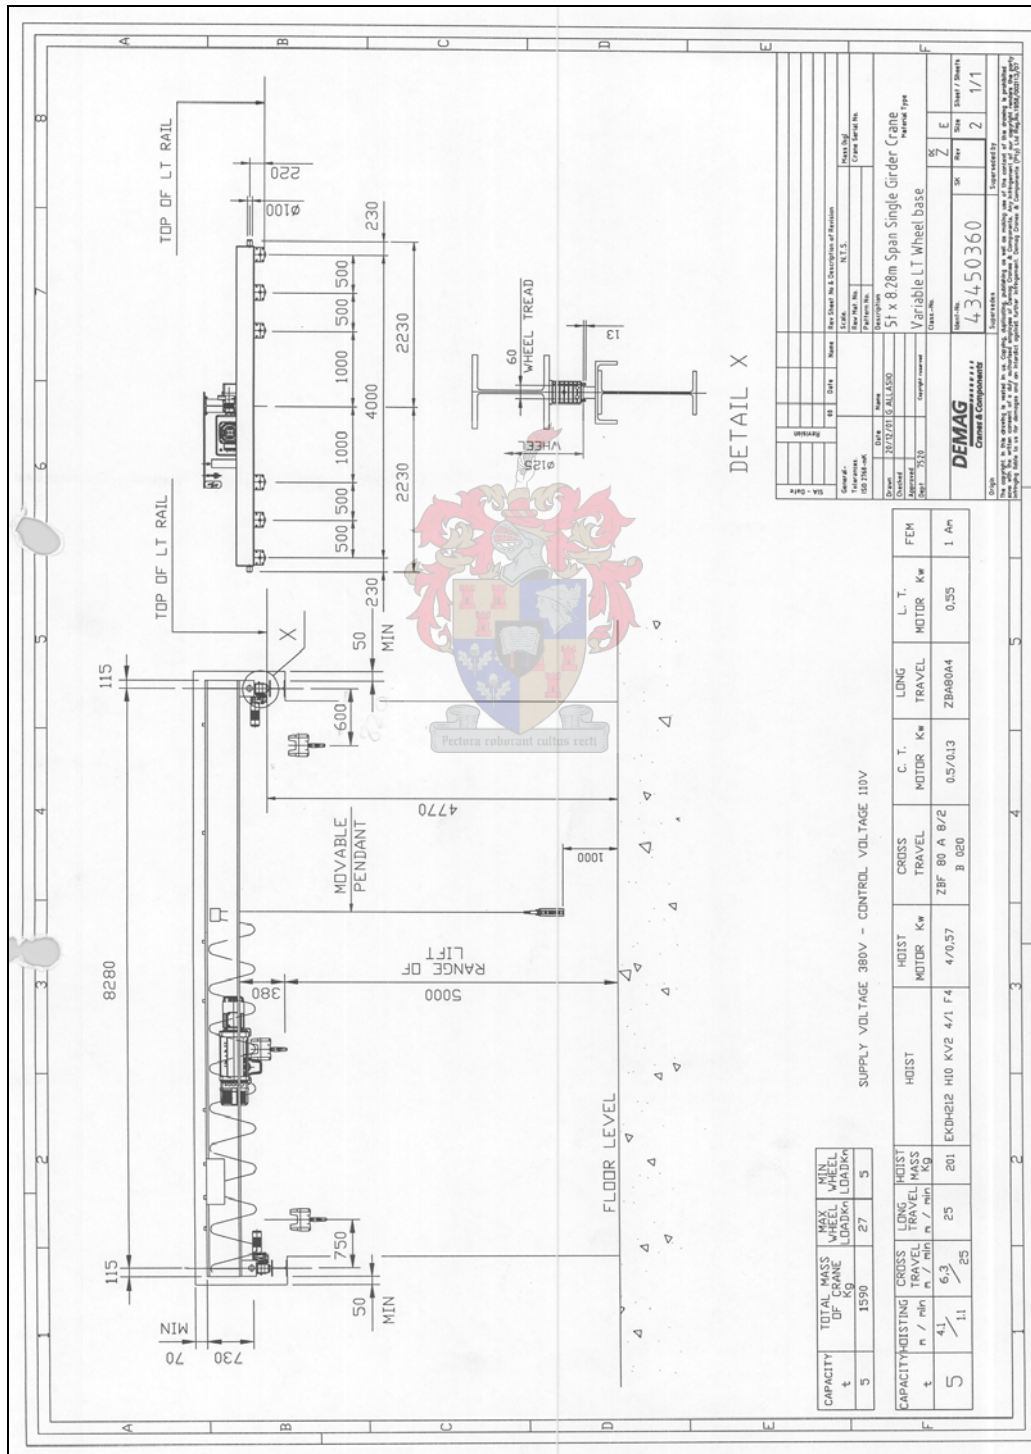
Design drawing of overhead crane (girder and rail not as built)
